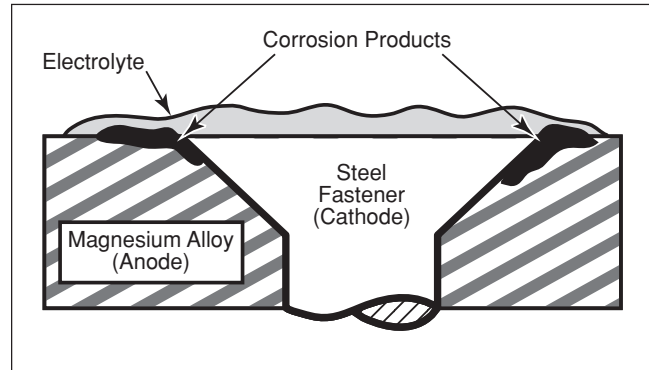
Galvanic Corrosion of Magnesium Adjacent to Steel Fastener
